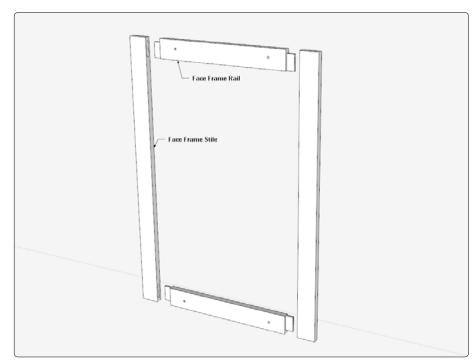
The exploded face frame. Shank holes are placed in the rails for fastening the plinth and cornice molding with flat-head wood screws.
